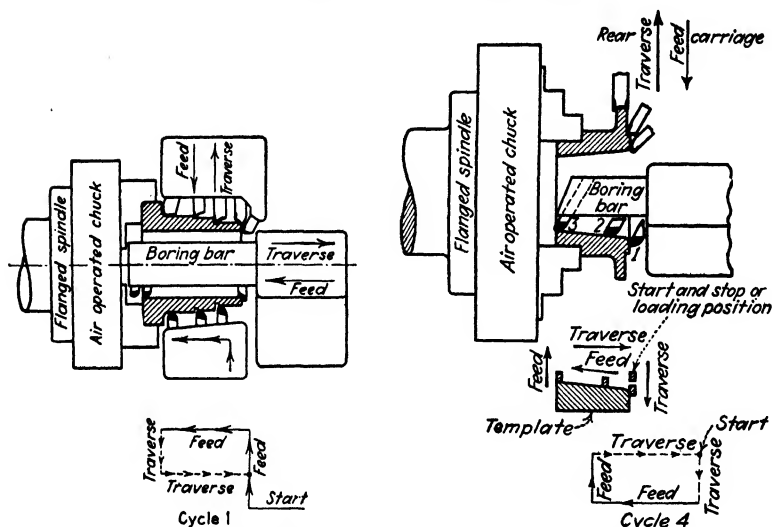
Two diagrams of tool layouts for boring and turning.
